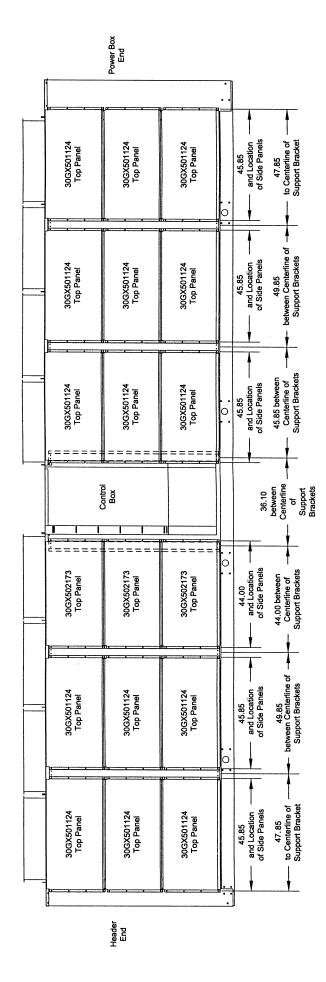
L — Unit Assembly, 30GX281-350 Oil Separator Side Only
